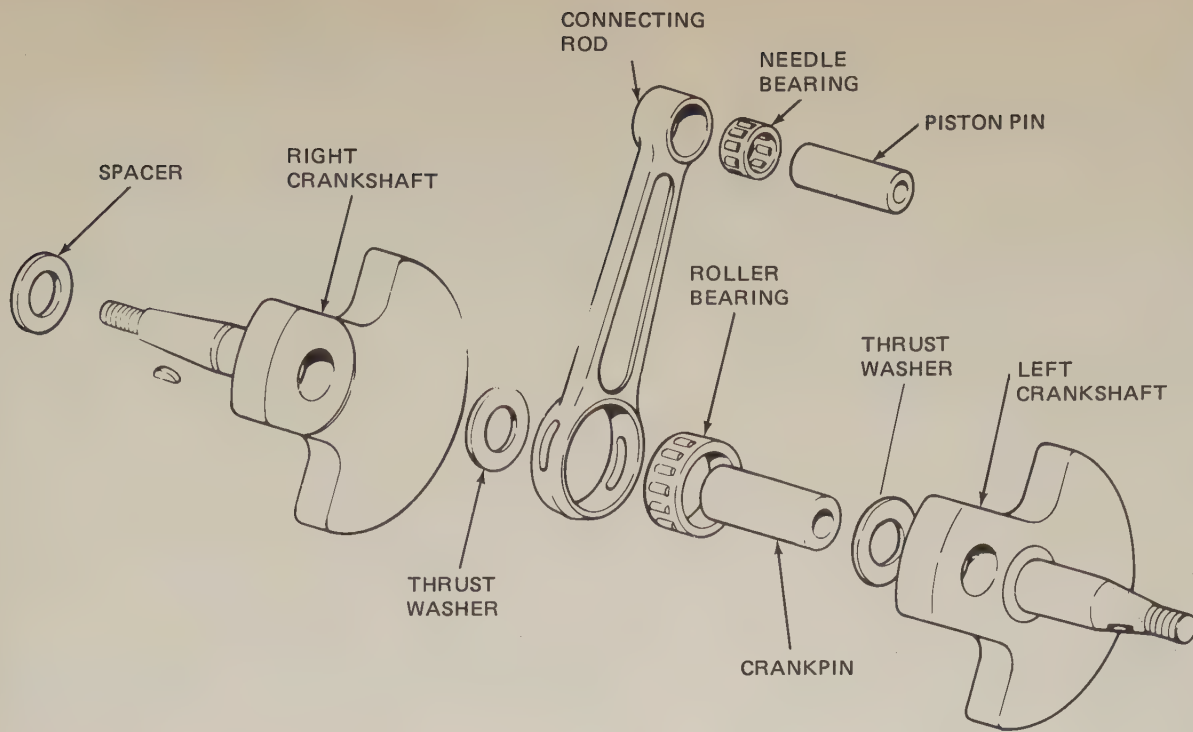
Disassembled view of a built-up crankshaft for a single-cylinder engine. (Harley-Davidson Motor Company, Inc.)
